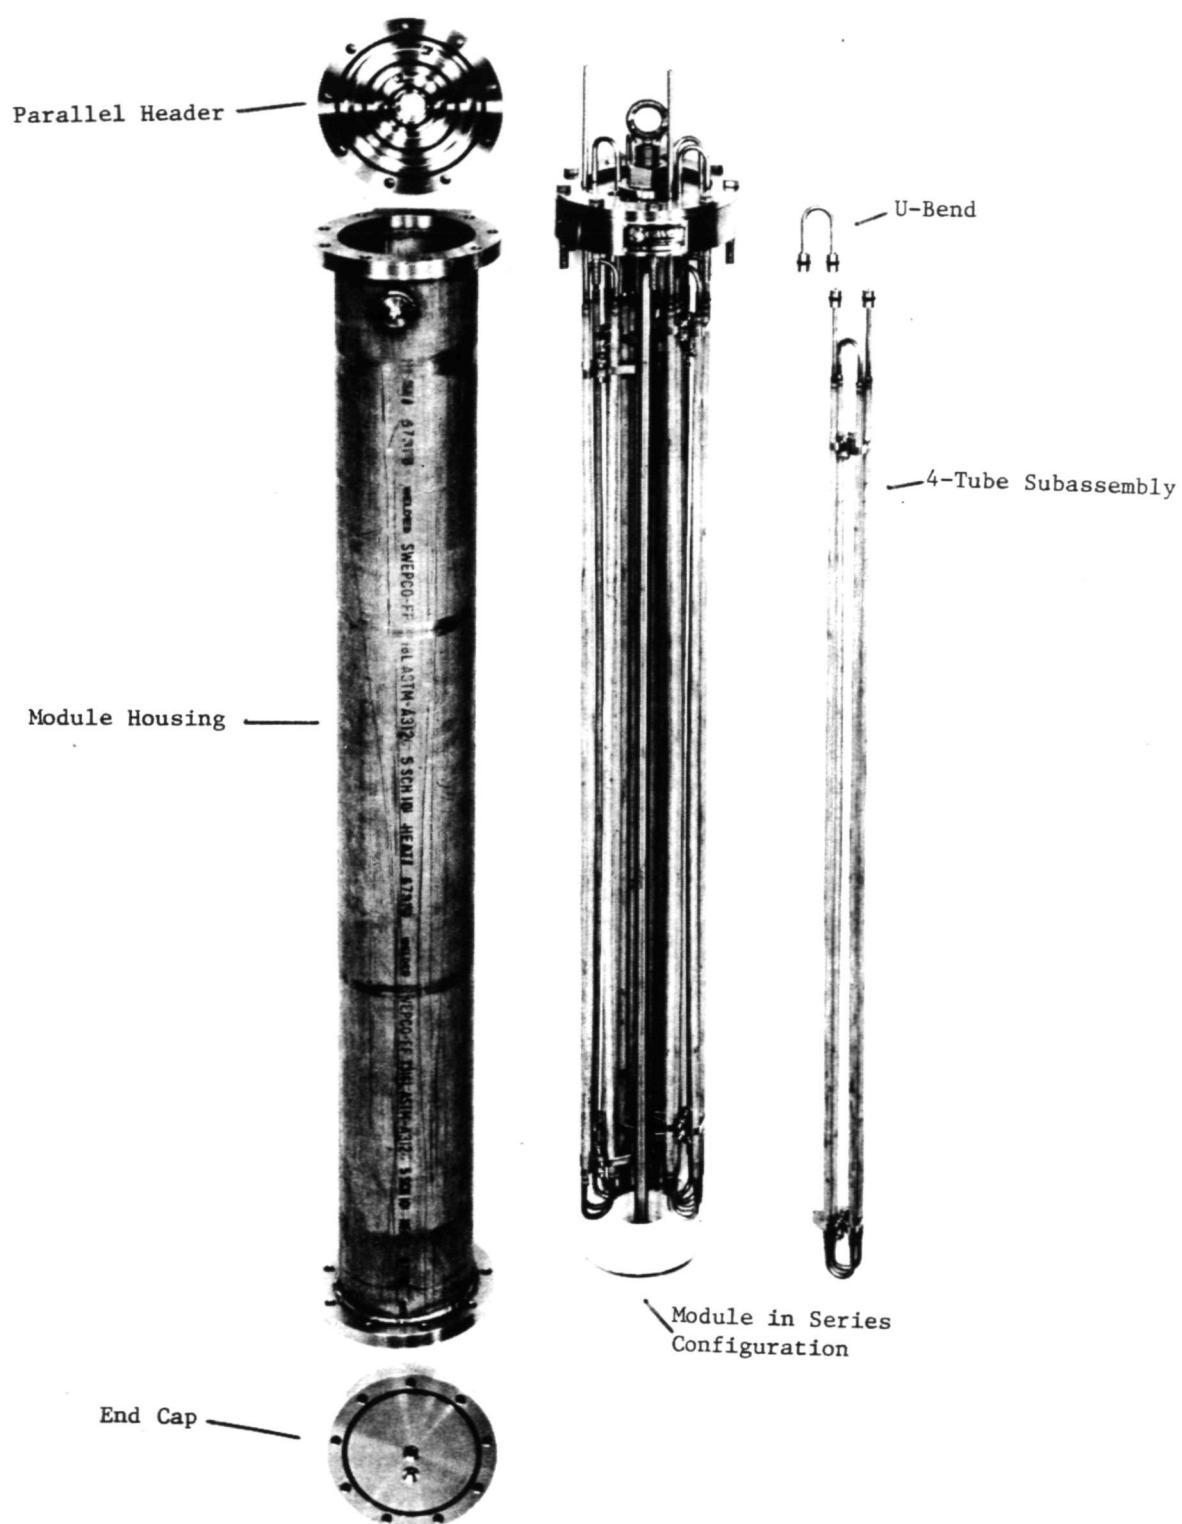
EXPLODED VIEW OF MULTI-TUBE MODULE
